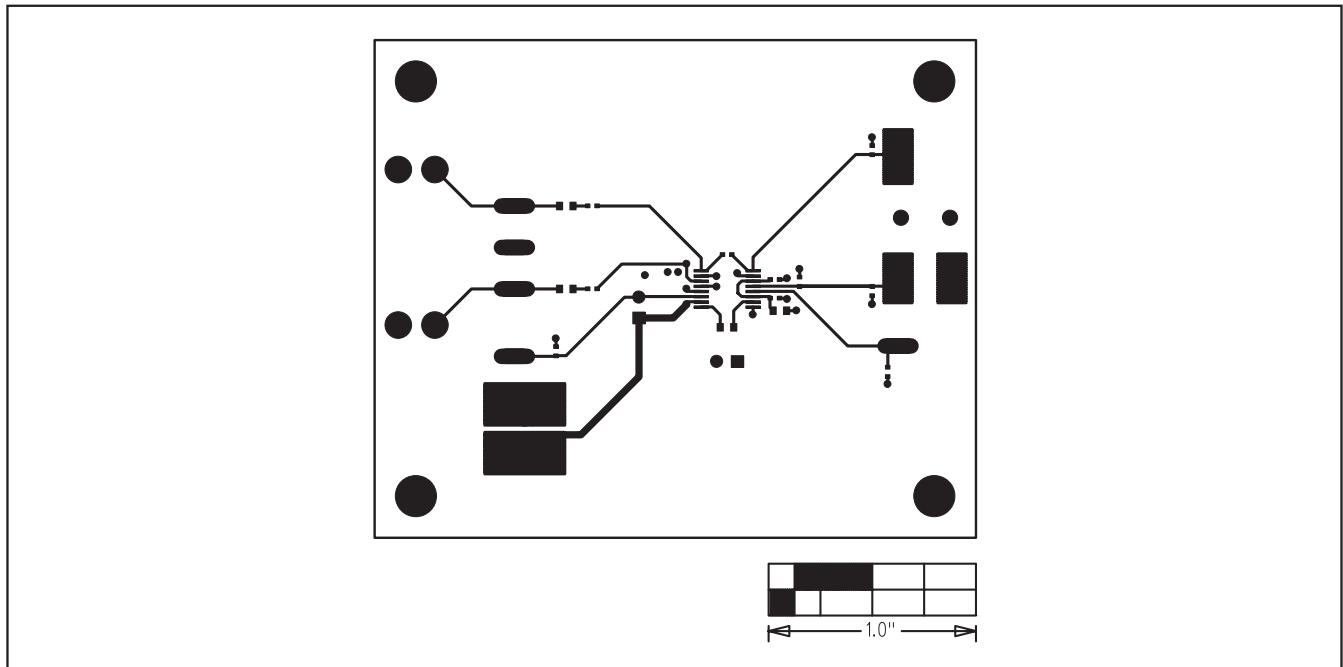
MAX13331 EV Kit PCB Layout—Component Side
